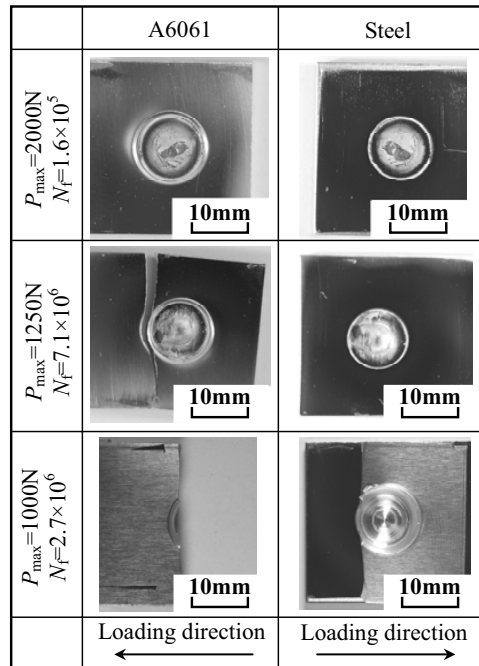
Macroscopic appearance of fatigue fractured specimens in A6061-Steel dissimilar welds
